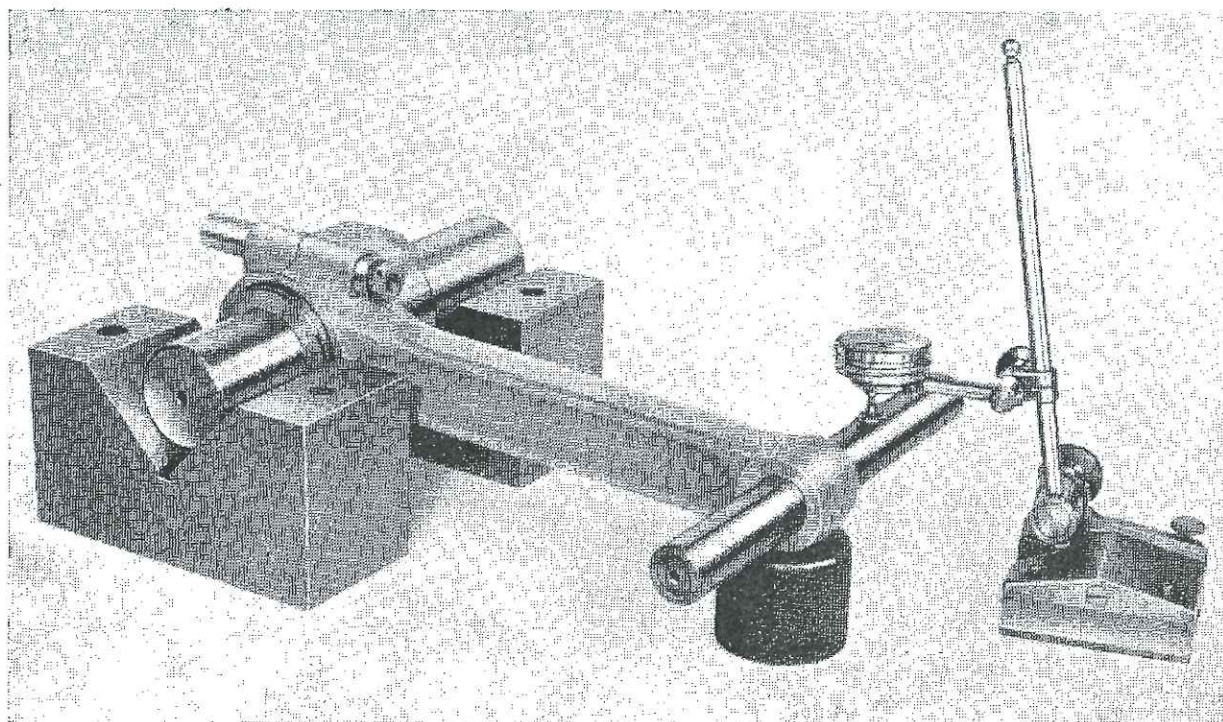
Checking gudgeon pin hole for twist, using clock indicator.
